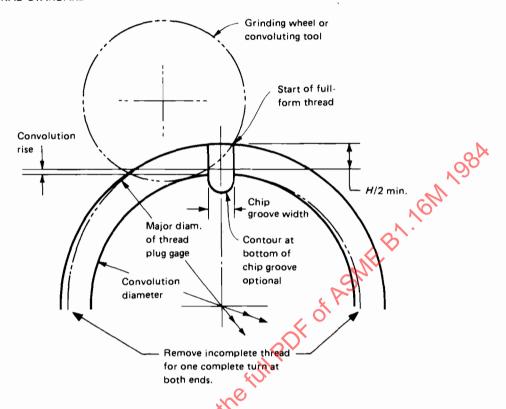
PARTIAL END THREADS AND CHIP GROOVES
